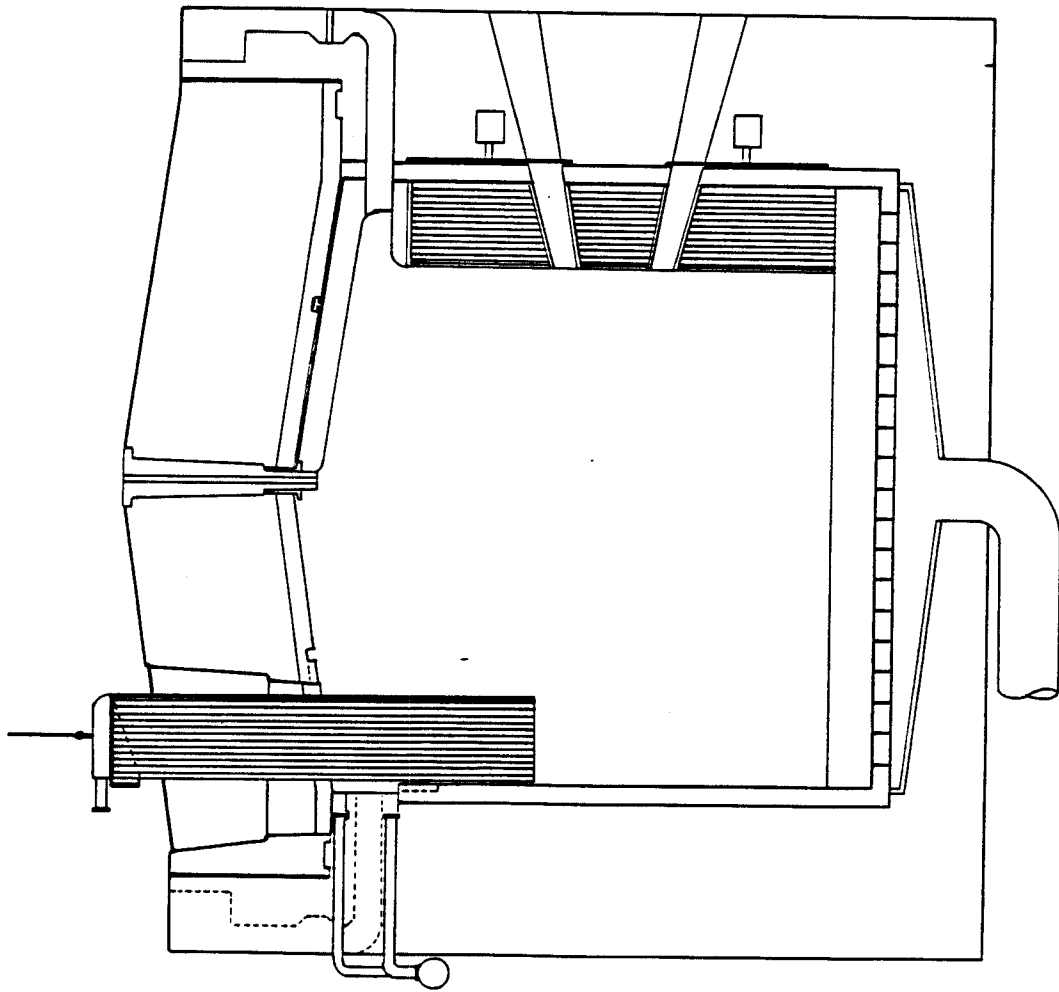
Cross section showing removal of a radial blanket module.
